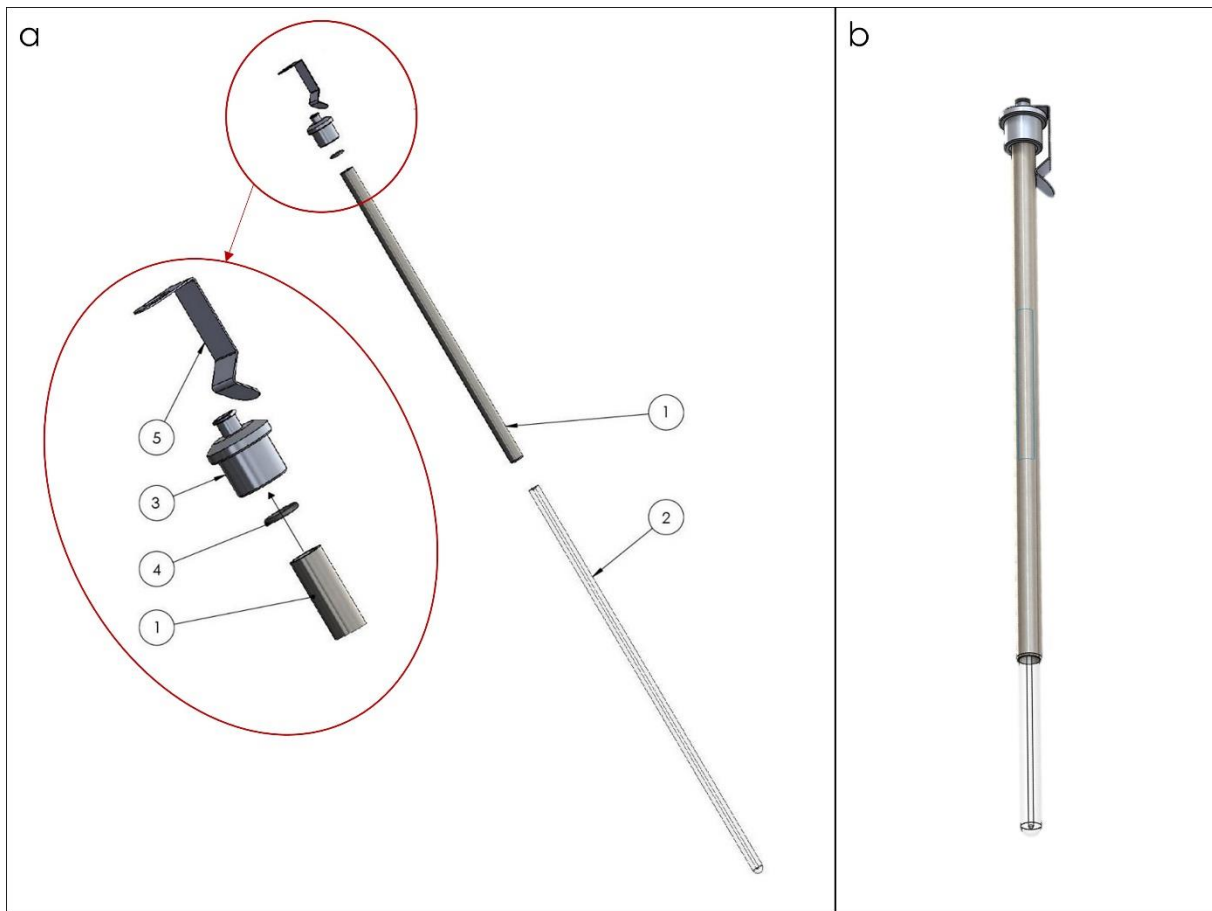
(a) Expanded view of the fiber guide: a borosilicate glass tube (2) is inserted into the stainless steel tube (1); a stainless steel luer adaptor (3), a PTFE seal for impermeability (5) and a stainless steel spring tab (5) hold the fiber guide against the trocar. (b) Assembled view of the fiber guide.
